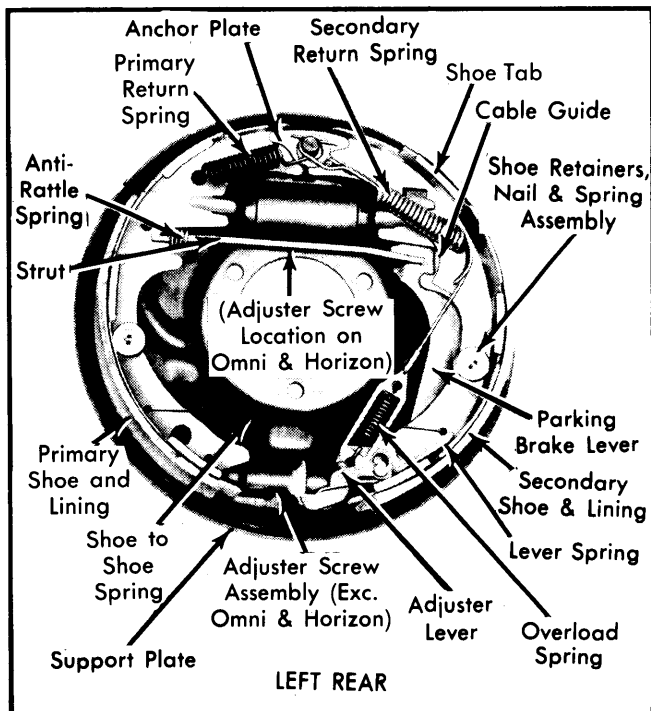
Bendix Automatic Adjuster Brake Assembly (Chrysler Corp. 10" Assembly Shown, Others Similar)
